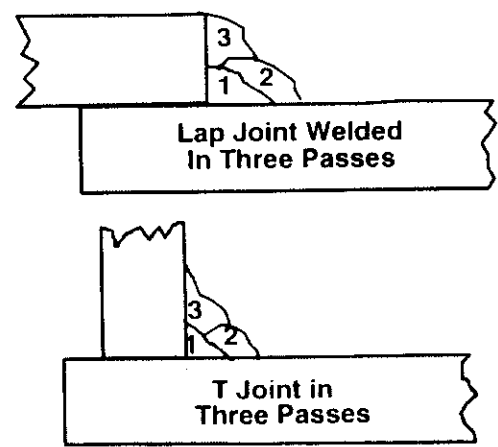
Triple Pass Lap and T Weld Joint
